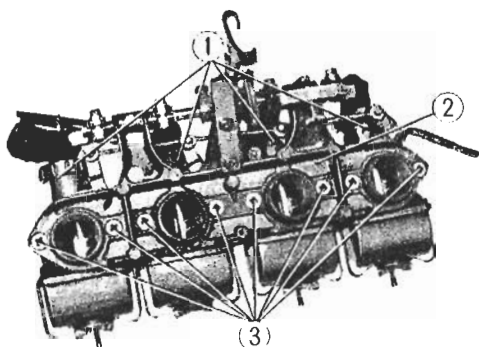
(1) Carburetor (2) Carburetor stay plate
